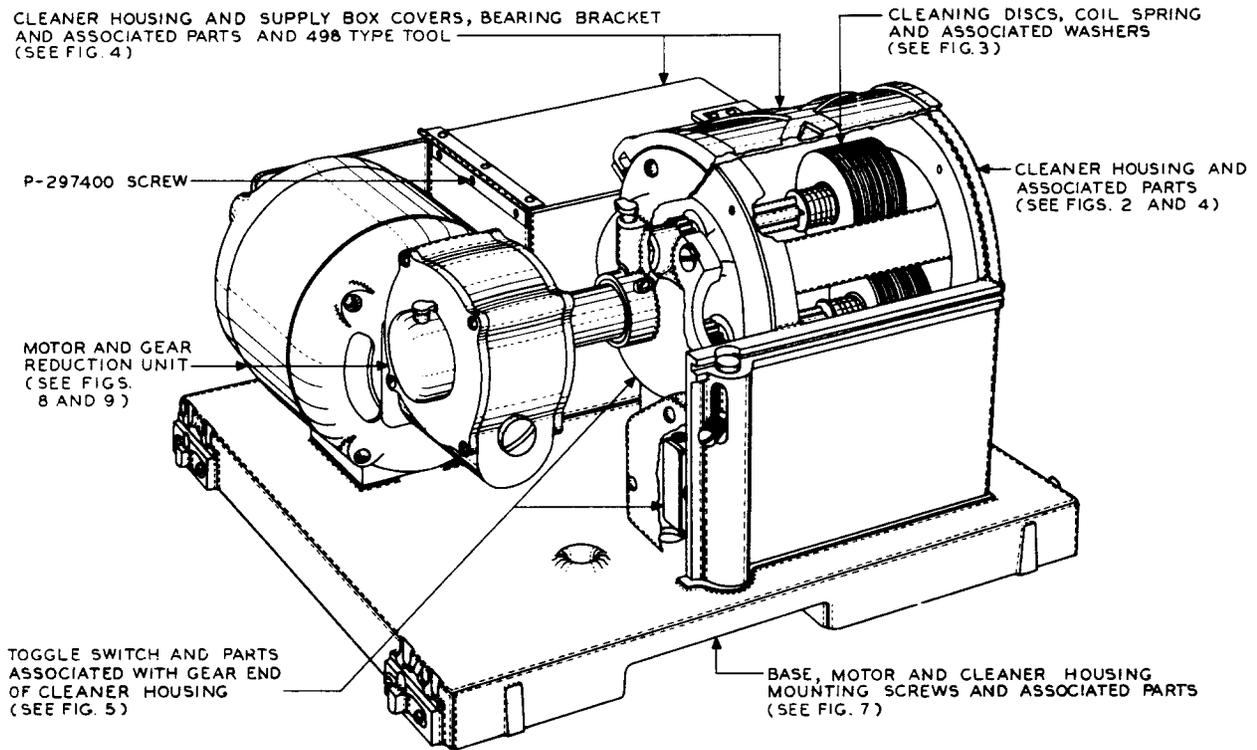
Nos. 497A, 497B, and D-159798 Tools (Portable Plug Cleaning Machine)
